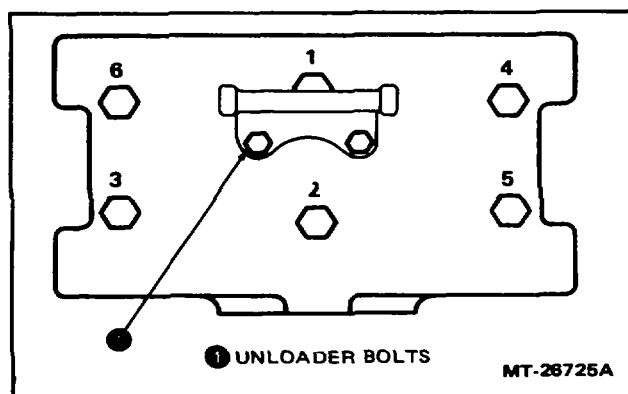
Cylinder Head Bolt-Tightening Sequence
